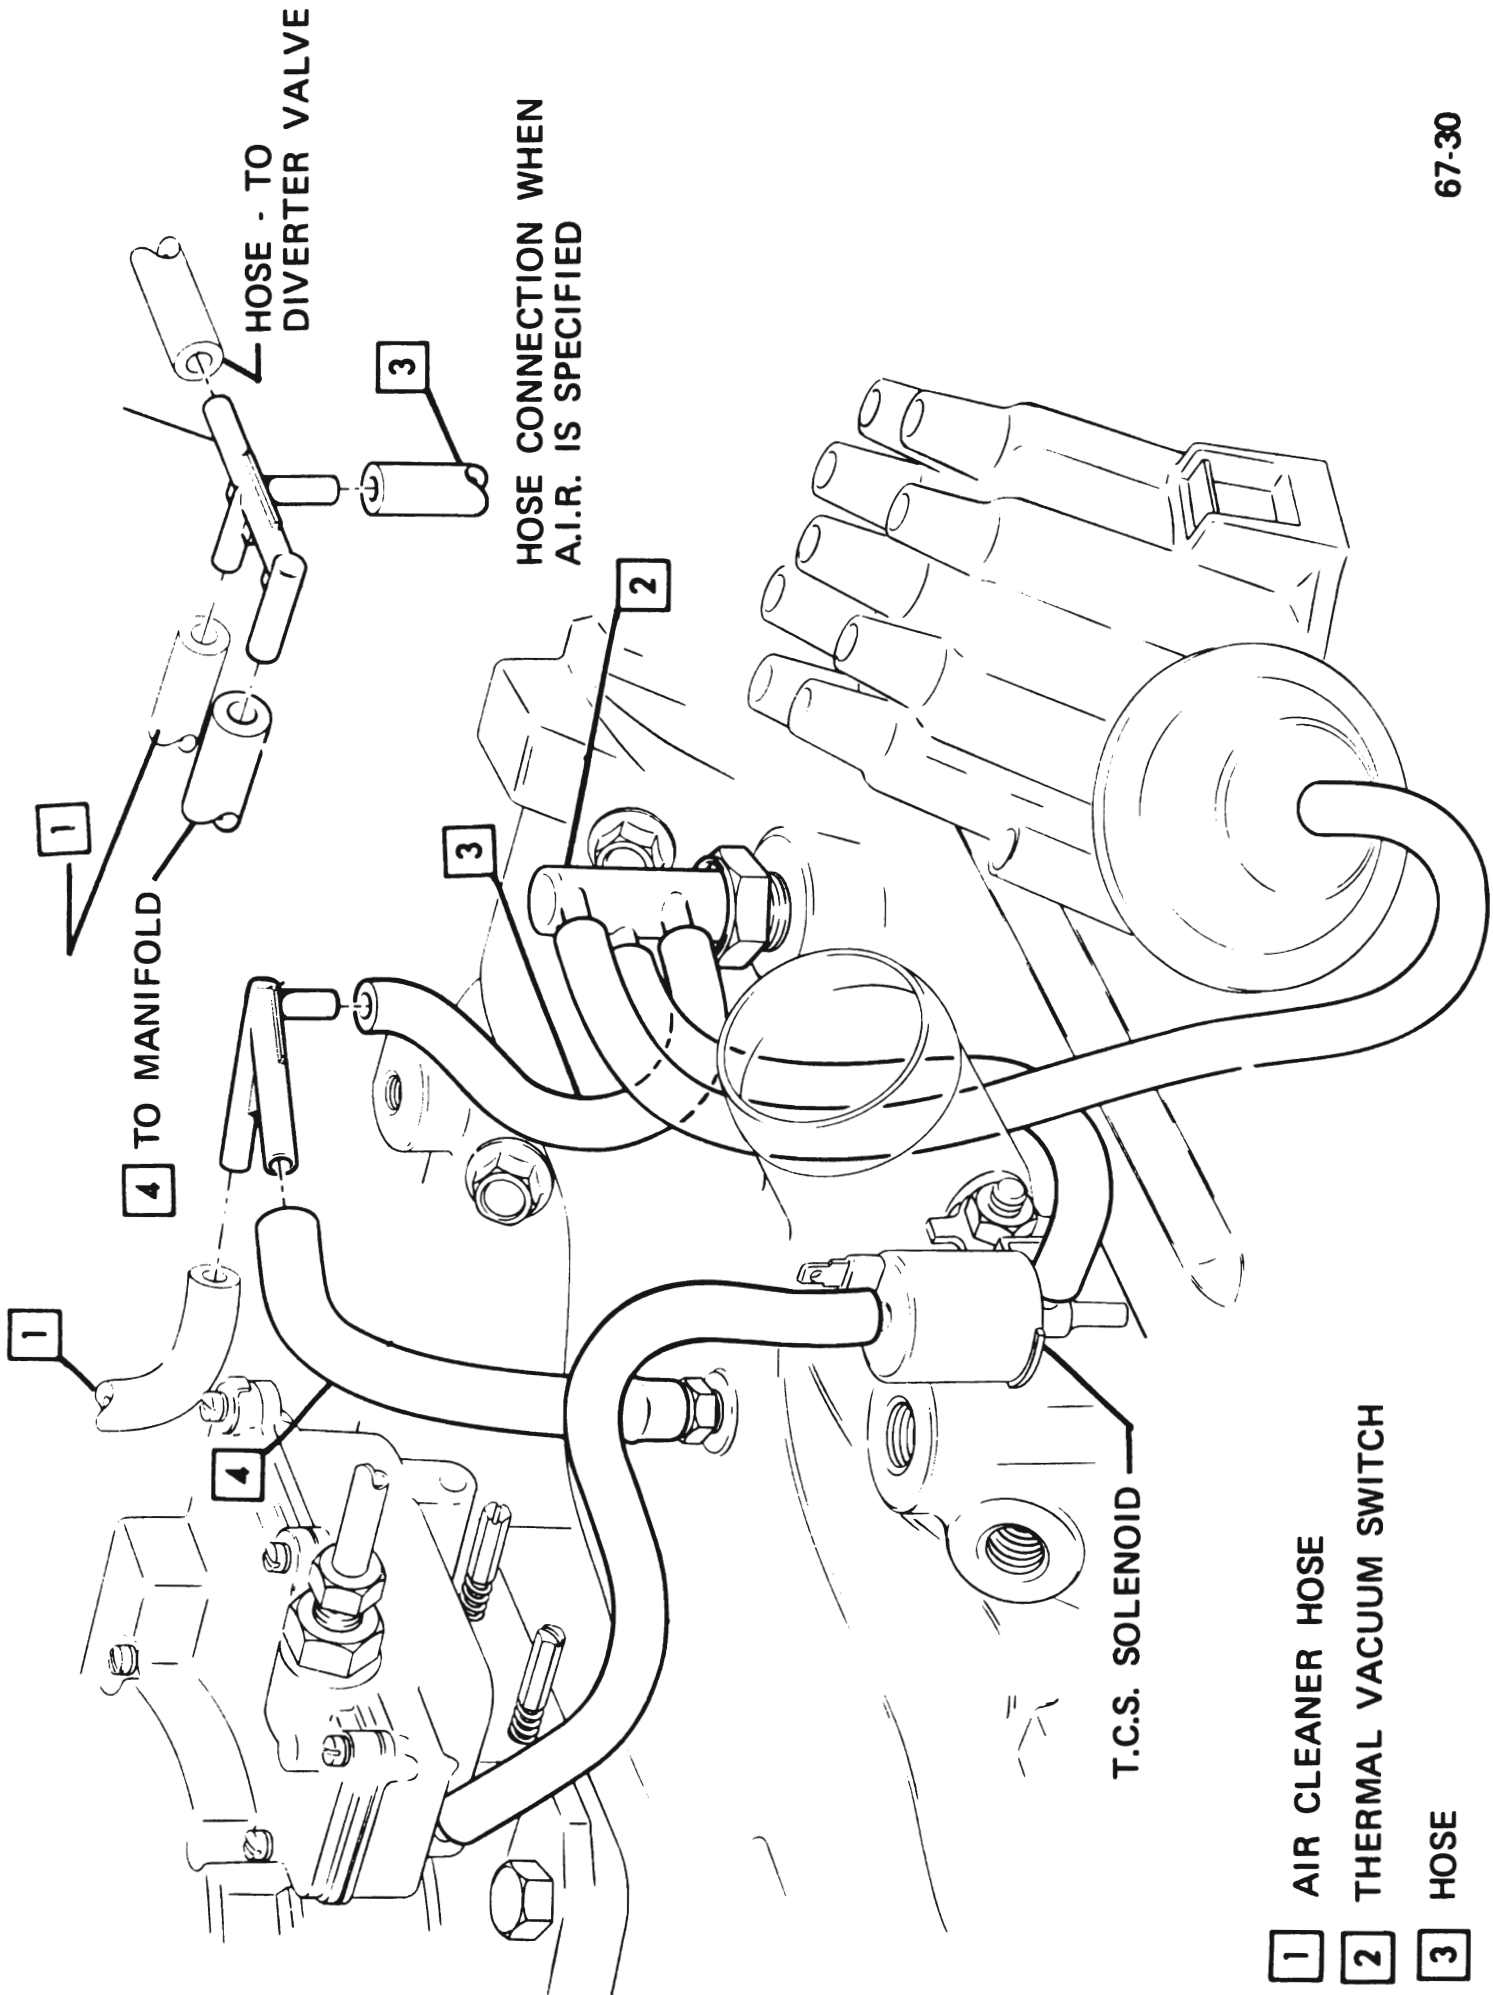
Vacuum Tube Routing - 350 2-BBL - 4D-4F-4H-4L-4N Series With Heavy Duty Cooling Less A/C
